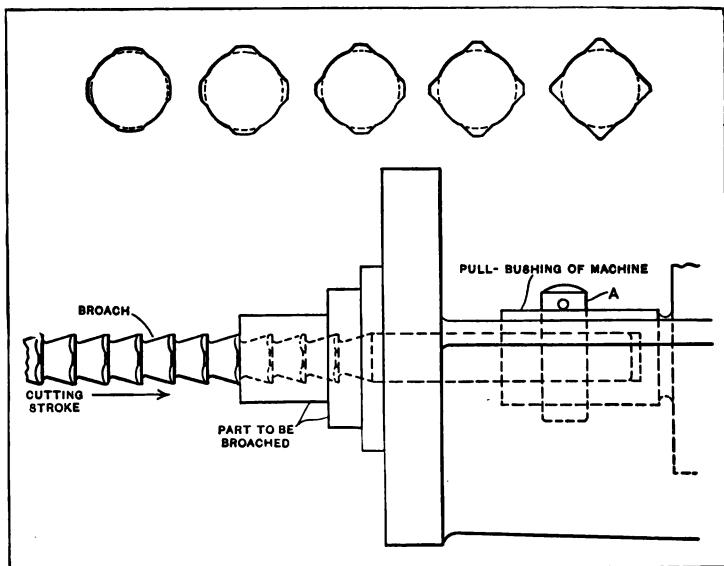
Diagram Illustrating Method of Broaching a Square Hole
